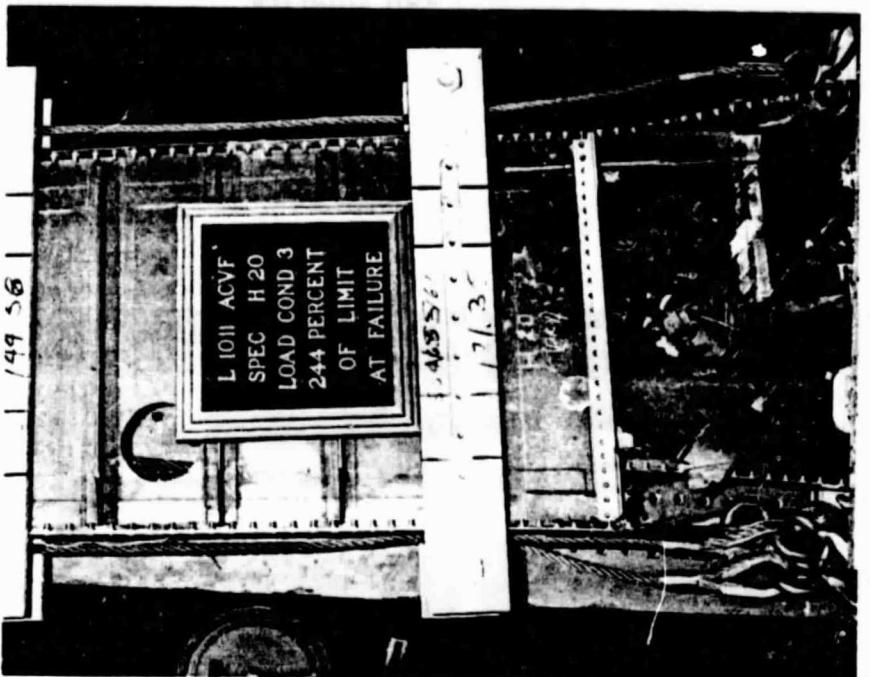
H20 RTD After Removal from Test Fixture Showing Failure Mode
